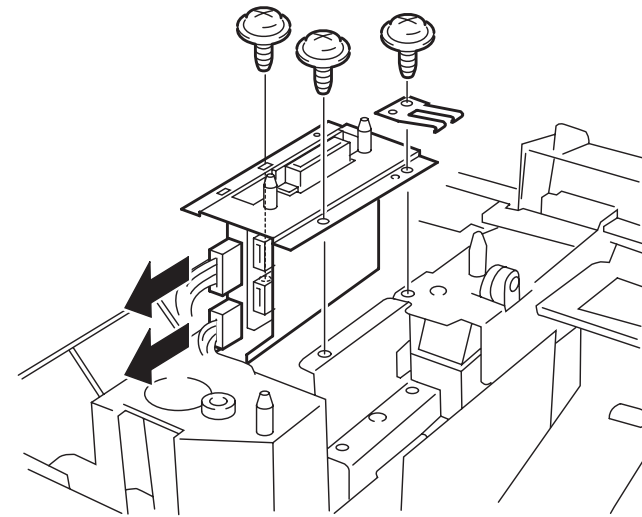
Removing the 500-sheet Cassette Unit Control Board Assy
